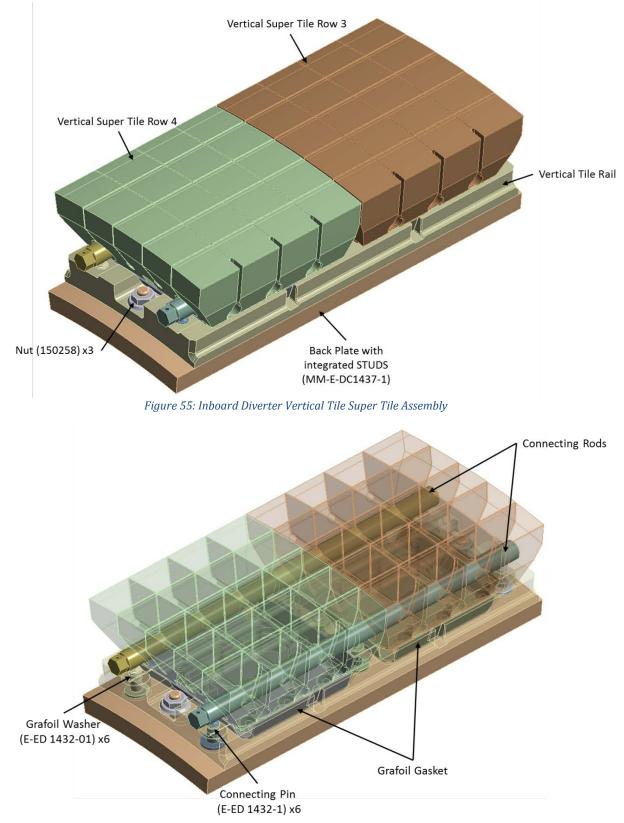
Inboard Diverter Vertical Tile Super Tile Assembly.
